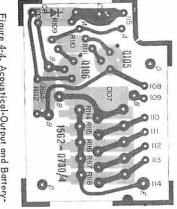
Acoustical-Output and Battery-Check etched-circuit assembly. (For complete etched-circuit assembly, order Part Number 1562-2731.)
